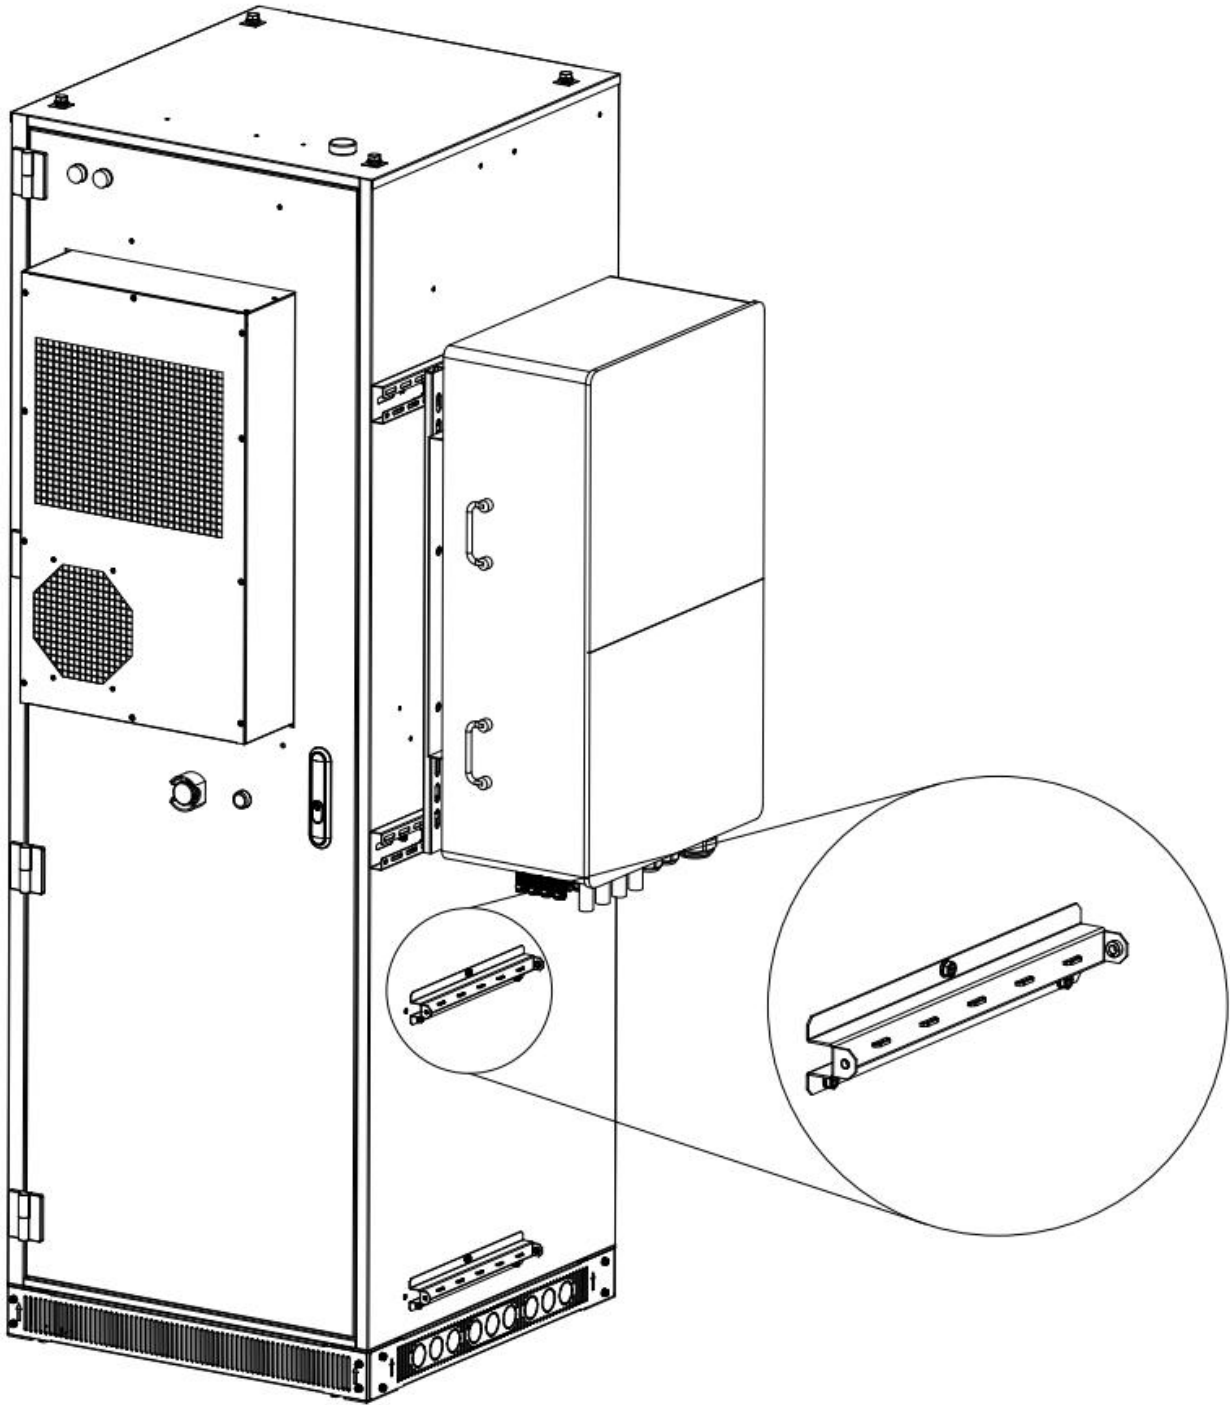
Mounting the removed cable management panel on the cabinet
